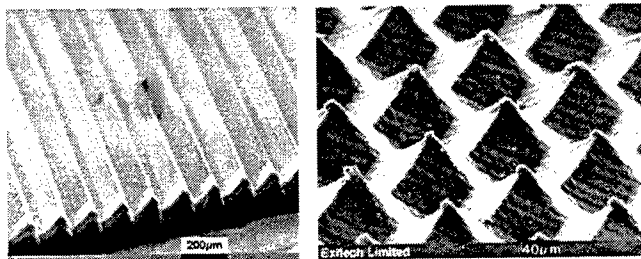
KrF laser produced surfaces in polycarbonate produced using mask-dragging techniques.
